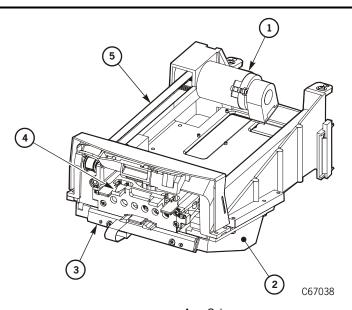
shows the hand-camera assembly which consists of a gripper, a motor-driven drive belt for gripper extension, and a bar code scanner card and camera (enclosed in a case under the hand components).
